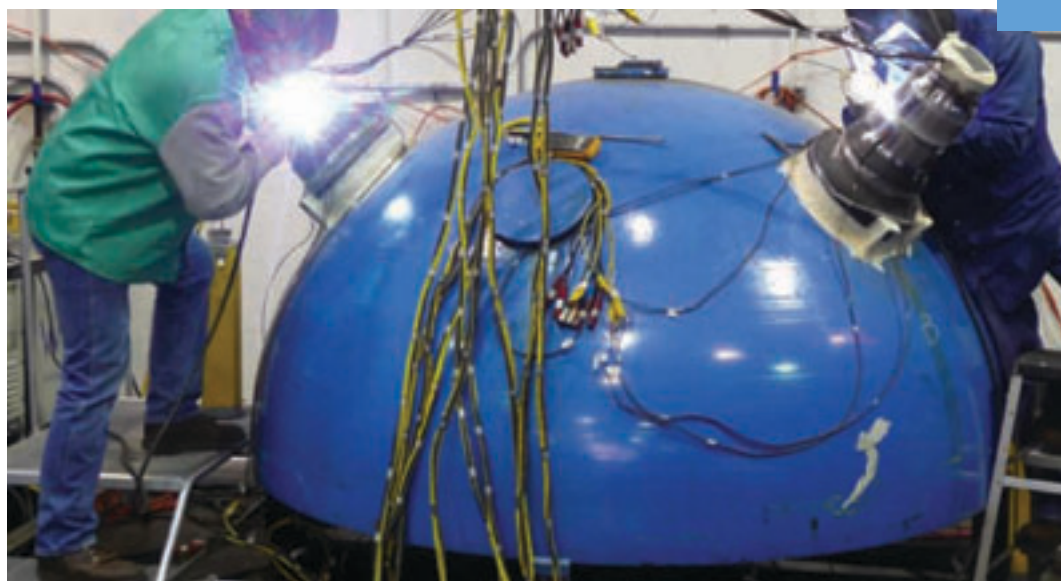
Mock-up construction of nozzle and safe-end extension on pressure vessel end cap. Nozzles are constructed under identical welding conditions either side.
